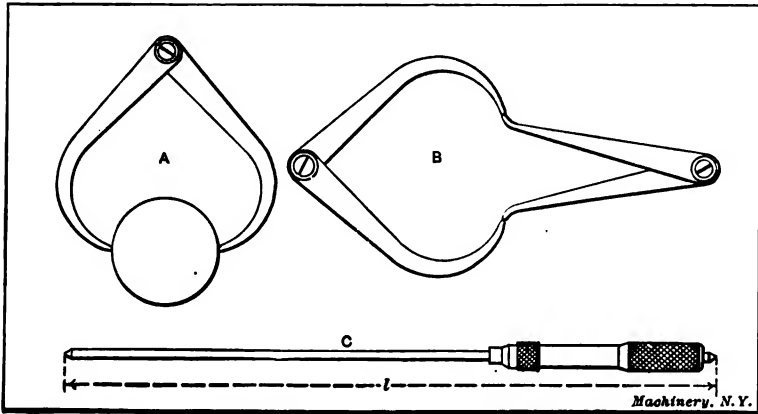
Setting Outside Calipers—Transferring Measurement to Inside Calipers—Micrometer Gage
